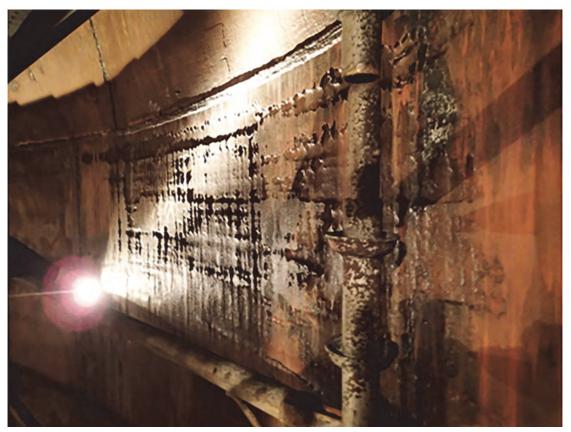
Corrosion of 12Cr Cladding in a Coke Drum Upper Section
